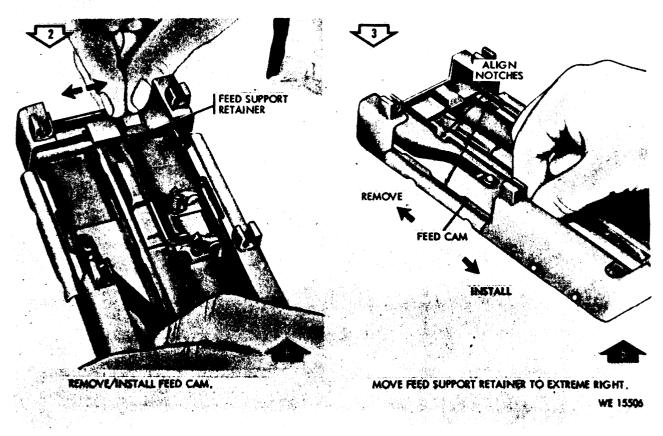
Disassembly / assembly of cover assembly. (1 of 2)
